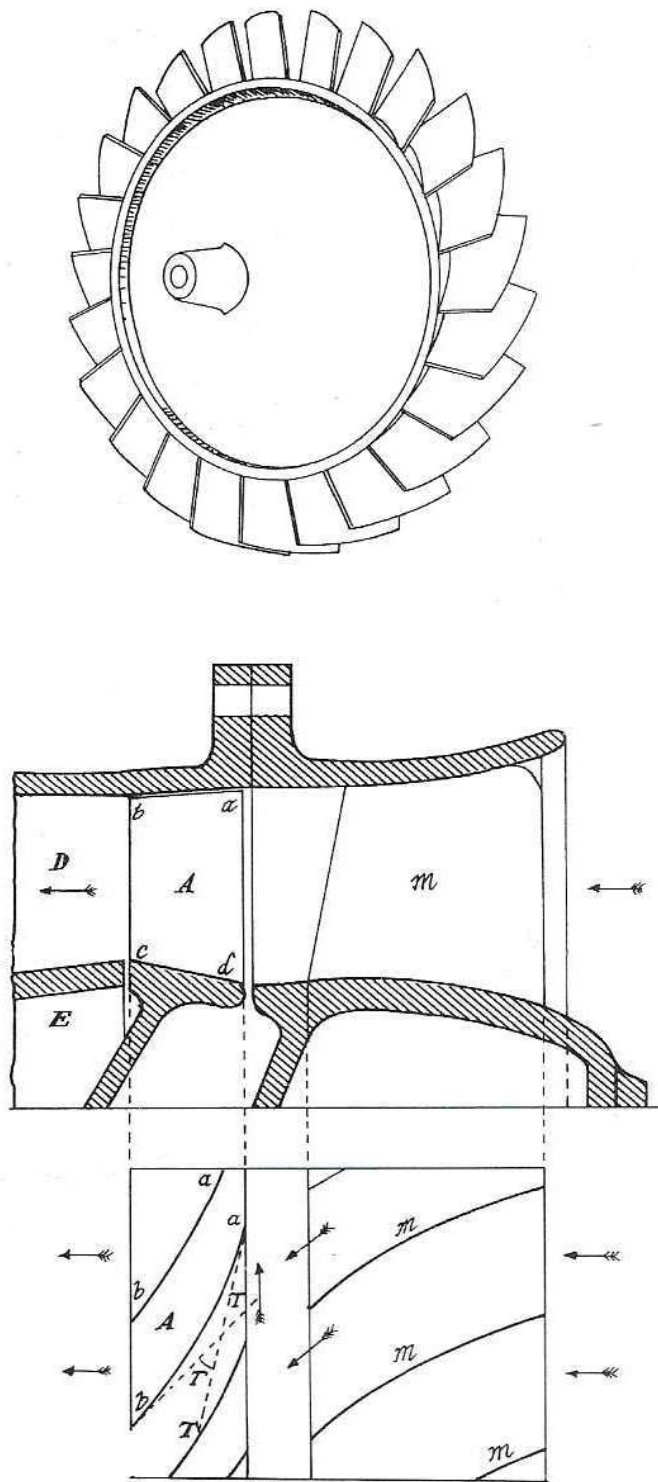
Rateau screw fan. Top: fan wheel. Centre: details of inlet guide vanes, wheel, and outlet diffuser. Bottom: air path through fan.
